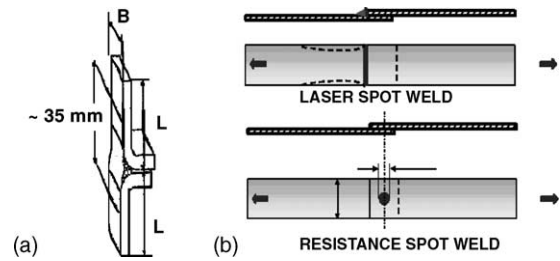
Tensile test—Laser brazing (a); laser spot weld and resistance spot weld specimens for single lap (b).
